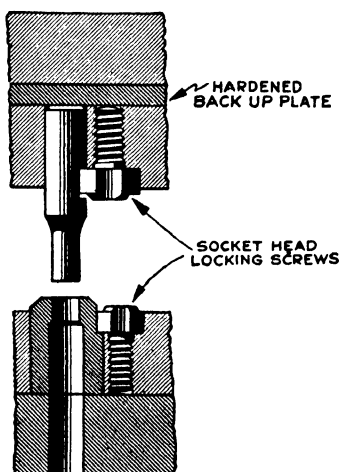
Section through vertical plane B-B in Fig. 112, showing the Hovis method for locking or removing interchangeable punches and dies. Each punch or die is locked under the shoulder of a socket-head screw, as shown. The punches and dies can be removed by backing up the locking screw a quarter turn. Broken members can then be replaced, or other sizes and shapes of punches and dies substituted, without removing the main die from the press. A jig is used for locating the correct position of the punch, relative to the die, after a button die has been mounted on the shoe.
